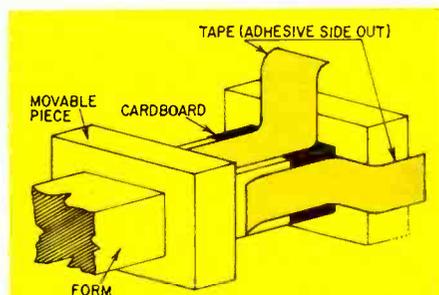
Place strips of tape (sticky side out) on form before winding any coils.
